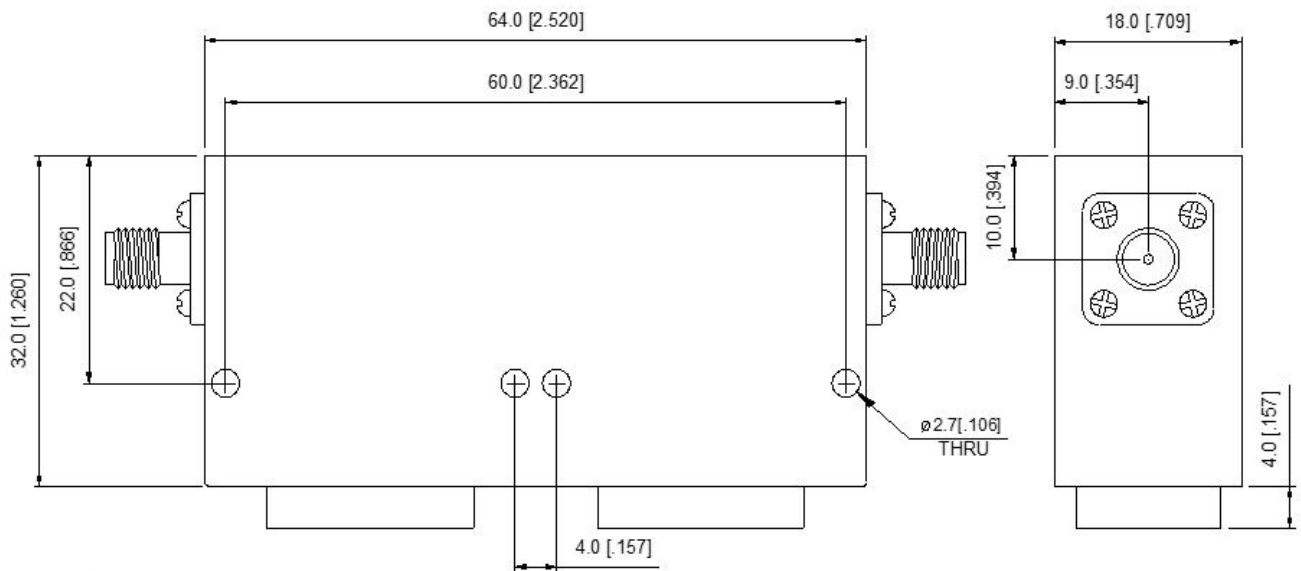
JX-CI1-2025M2110M-45N front panel layout
